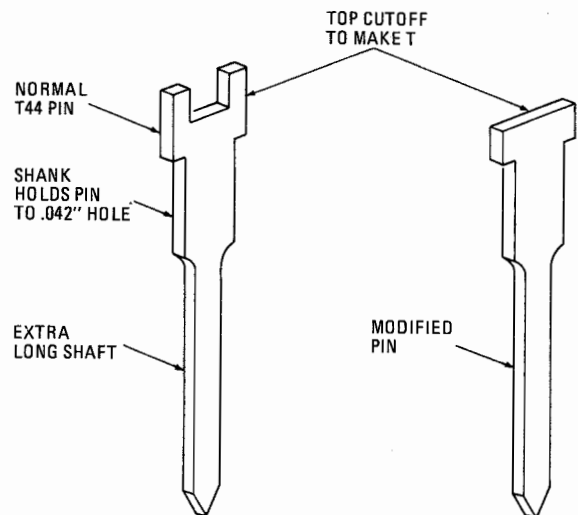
MODIFIED T-44 PIN has notch section cut off forming a "T" pin substitute for the type T-46.
